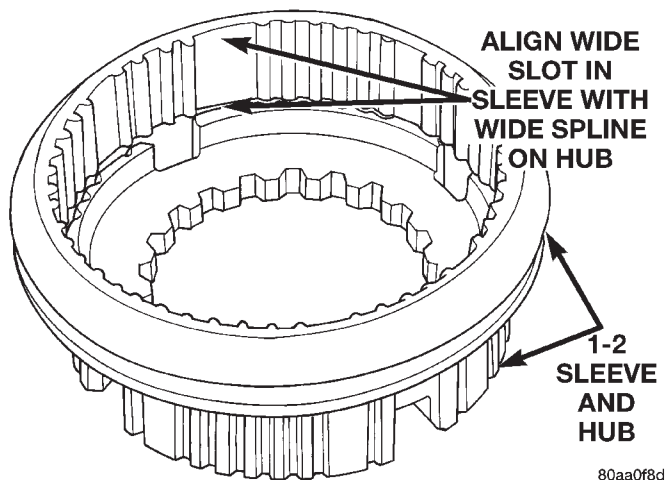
Installing 1-2 Synchro Sleeve On Hub
